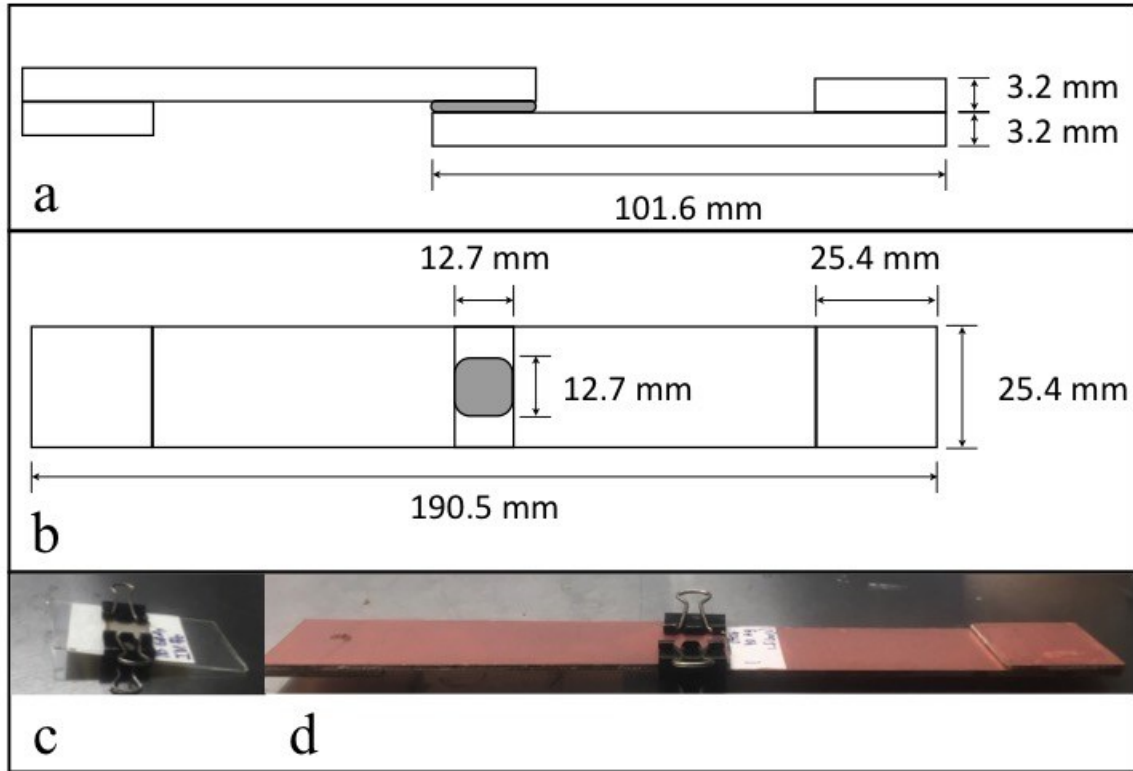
a) Schematic cross-section illustration of ASTM D1002 test coupon and its modified paste measurements; b) schematic top view illustration of ASTM D1002 test coupon and its modified paste measurements; c) example of test sample used for optical microscopy and optical profiling; d) example of test sample used for ASTM D1002 lap shear testing
